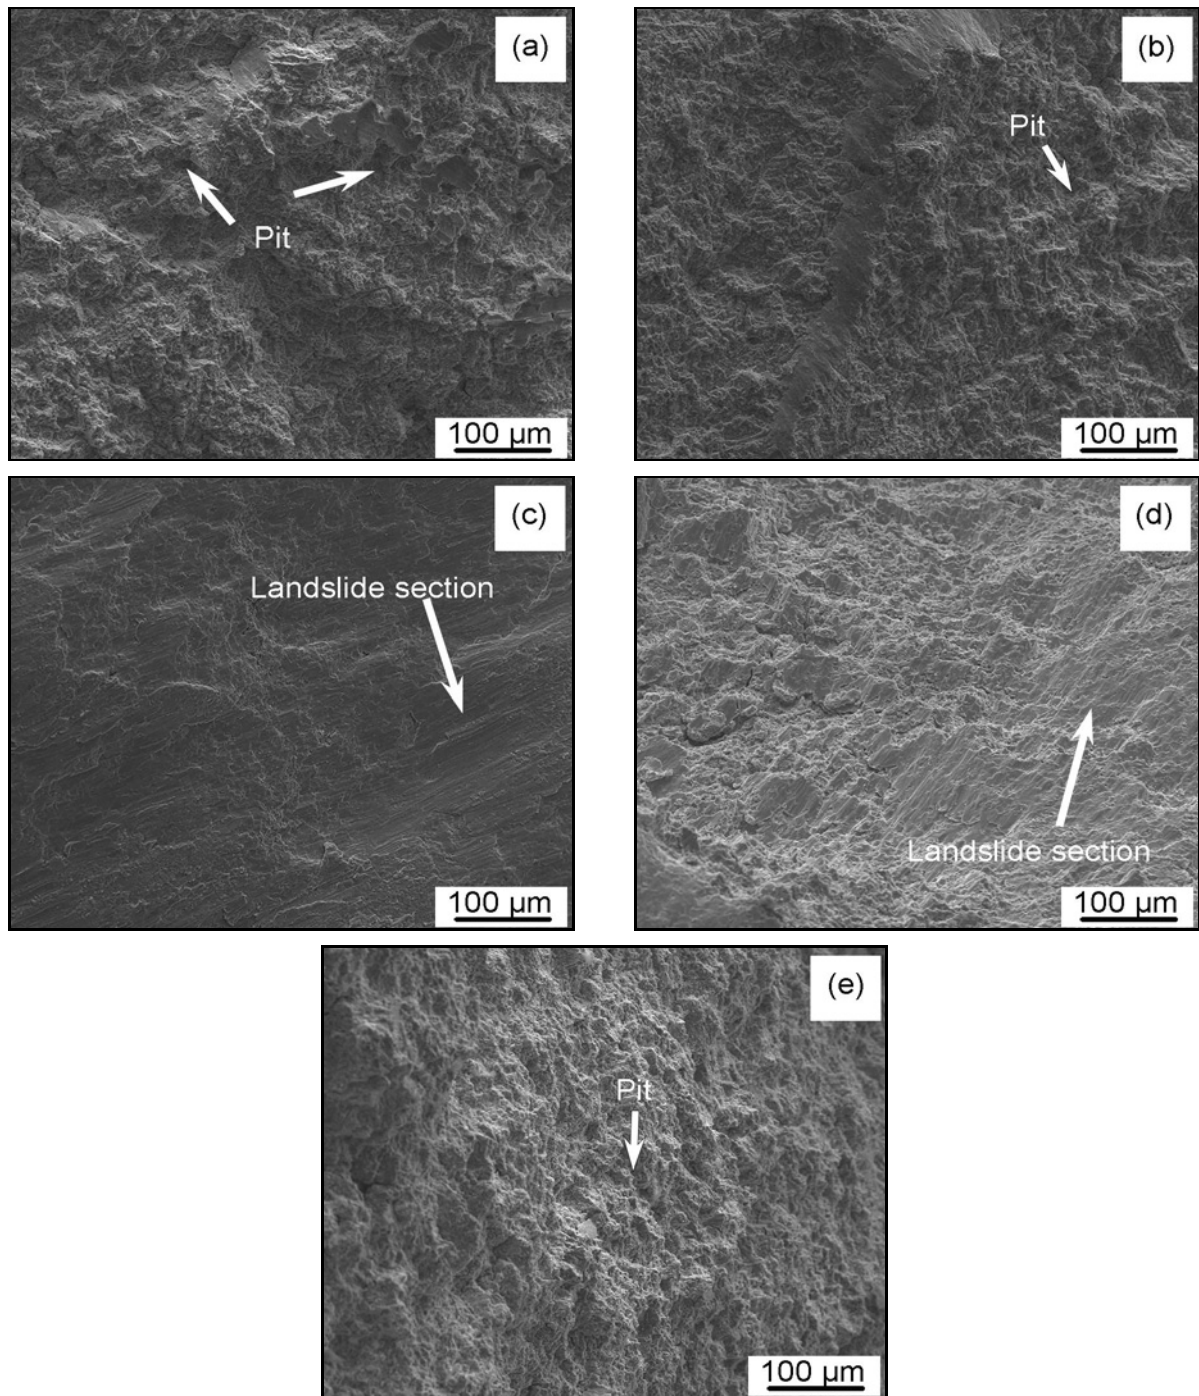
Fracture morphologies of (a) specimen 2, (b) specimen 6, (c) specimen 7, (d) specimen 10, and (e) specimen 15.
